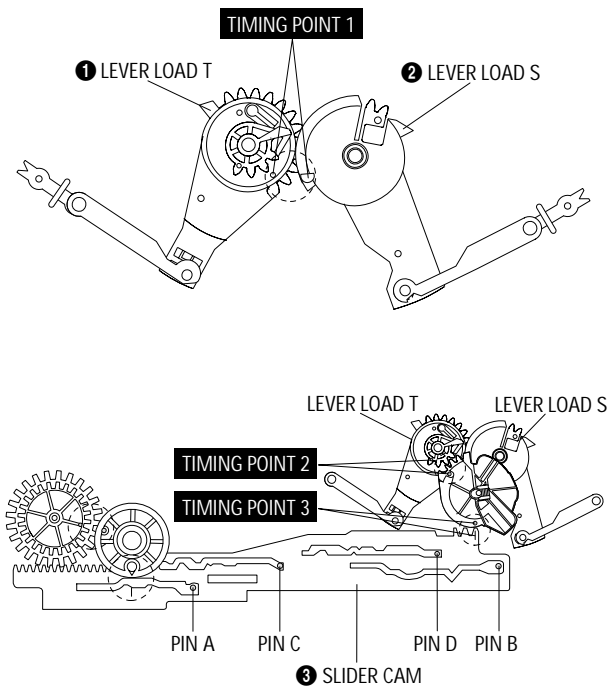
Gear Loading Drive, Slider Cam, Lever Load S, T Ass'y Assembly
